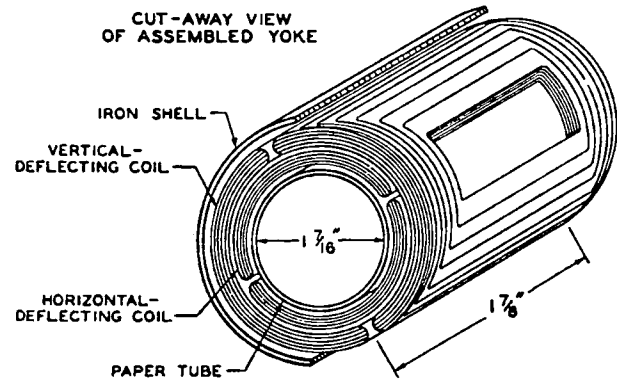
Wide-Angle Deflecting Yoke Assembly and Winding Scheme.
